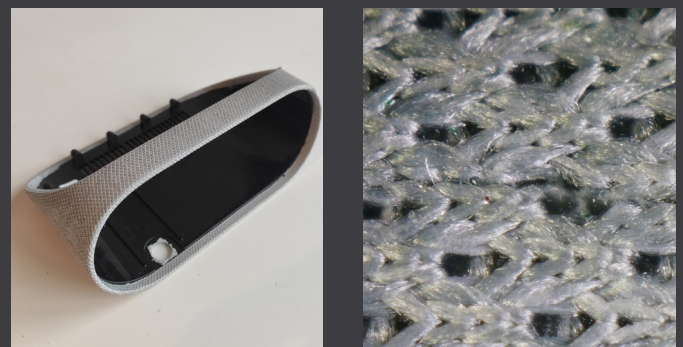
Invisible welded line in the Google Hub.
